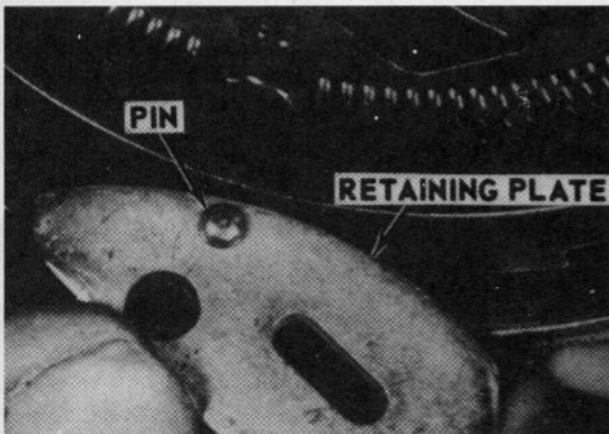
Install clutch spring (4—Fig. MC5-20) on model SP125 so that spring ends will contact locating pin in clutch spring retaining plate.
